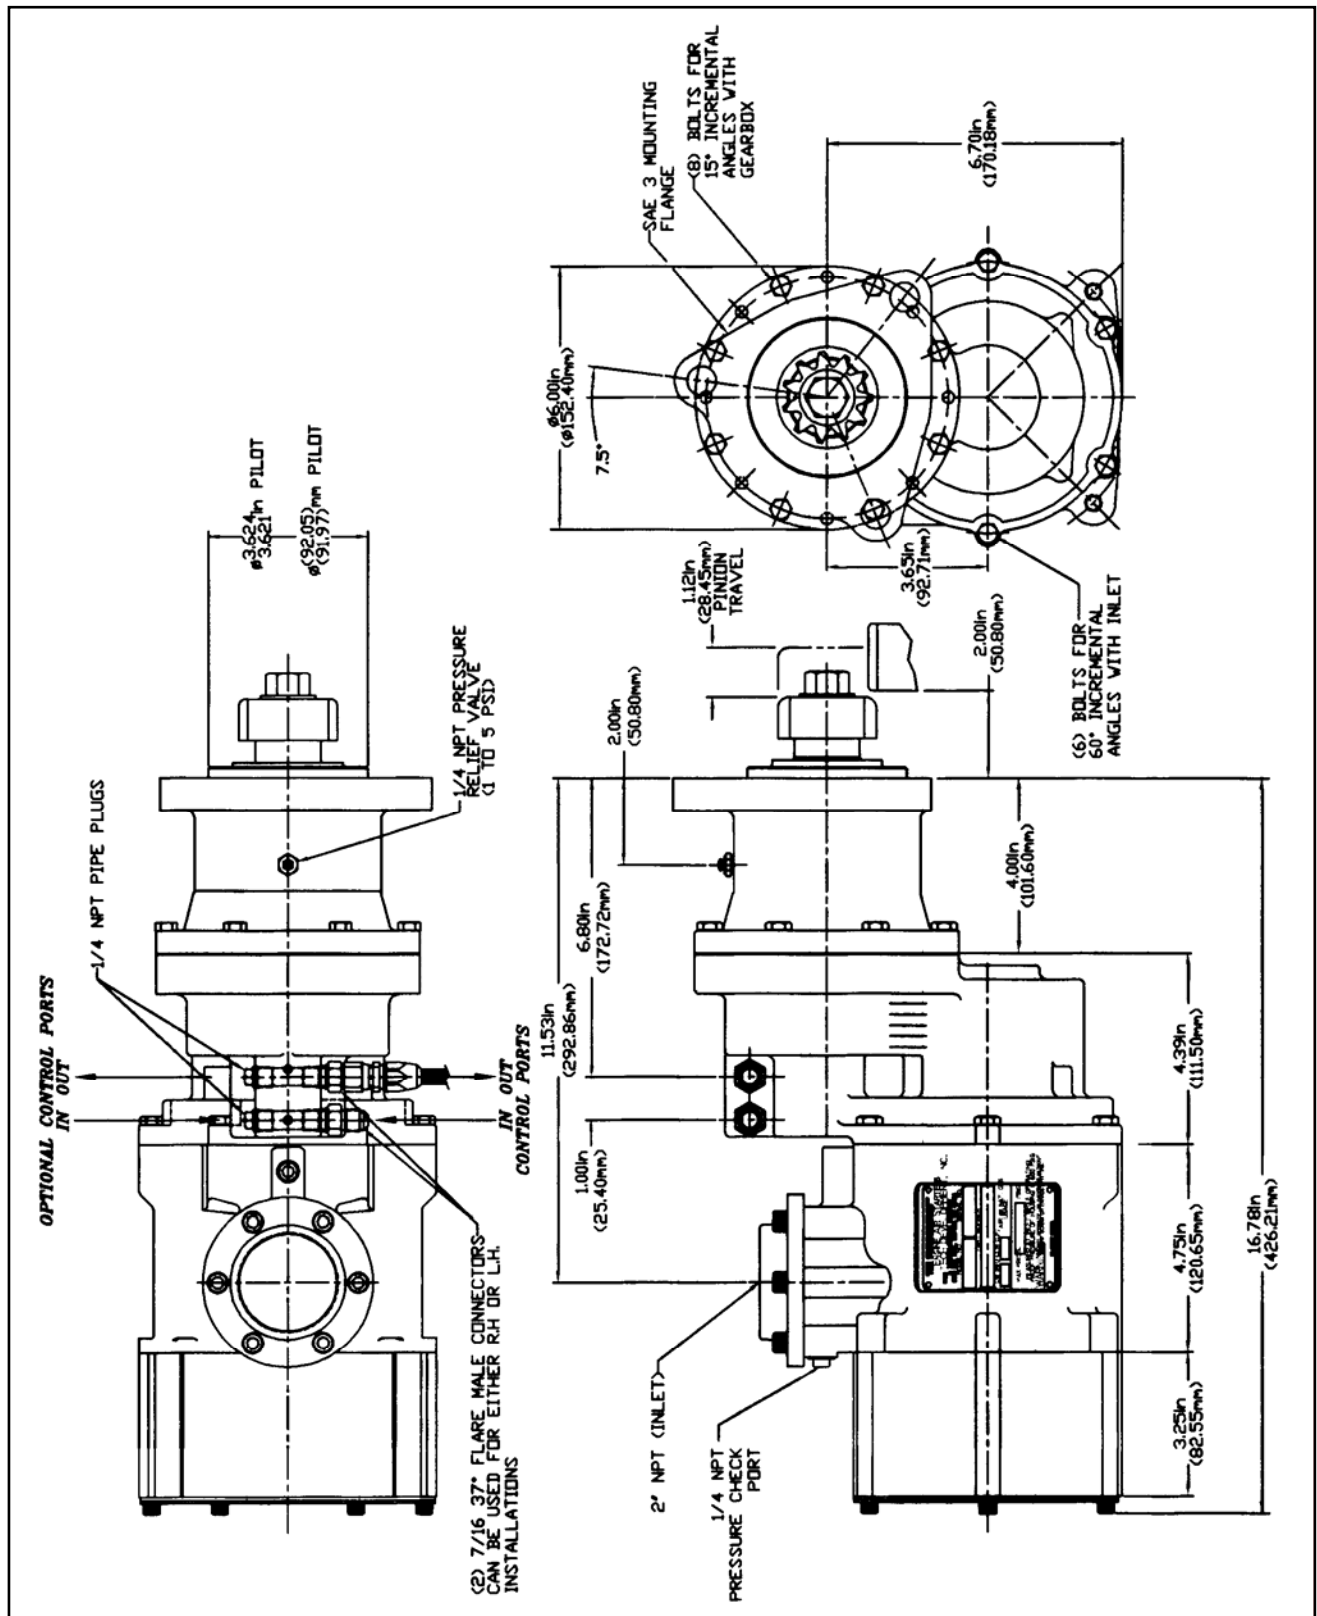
T100-V TURBOTWIN Air Starter with Exhaust Guard
